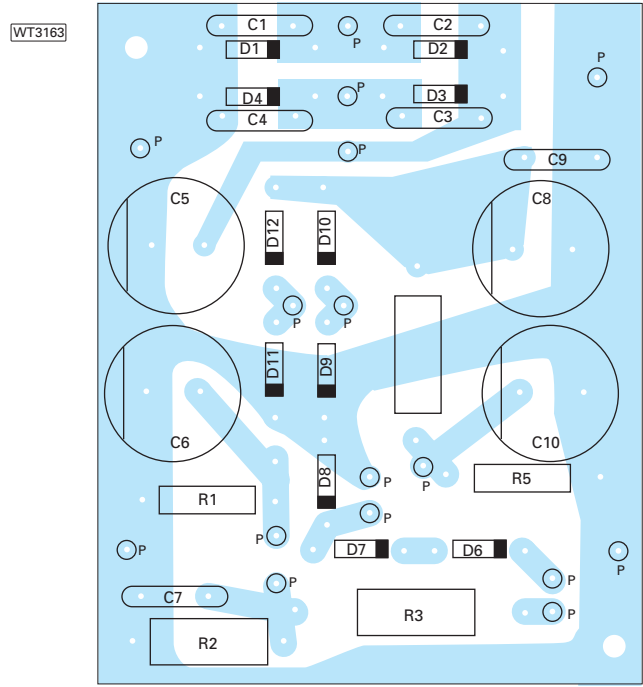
A suitable printed circuit board, showing the track and component overlay.
